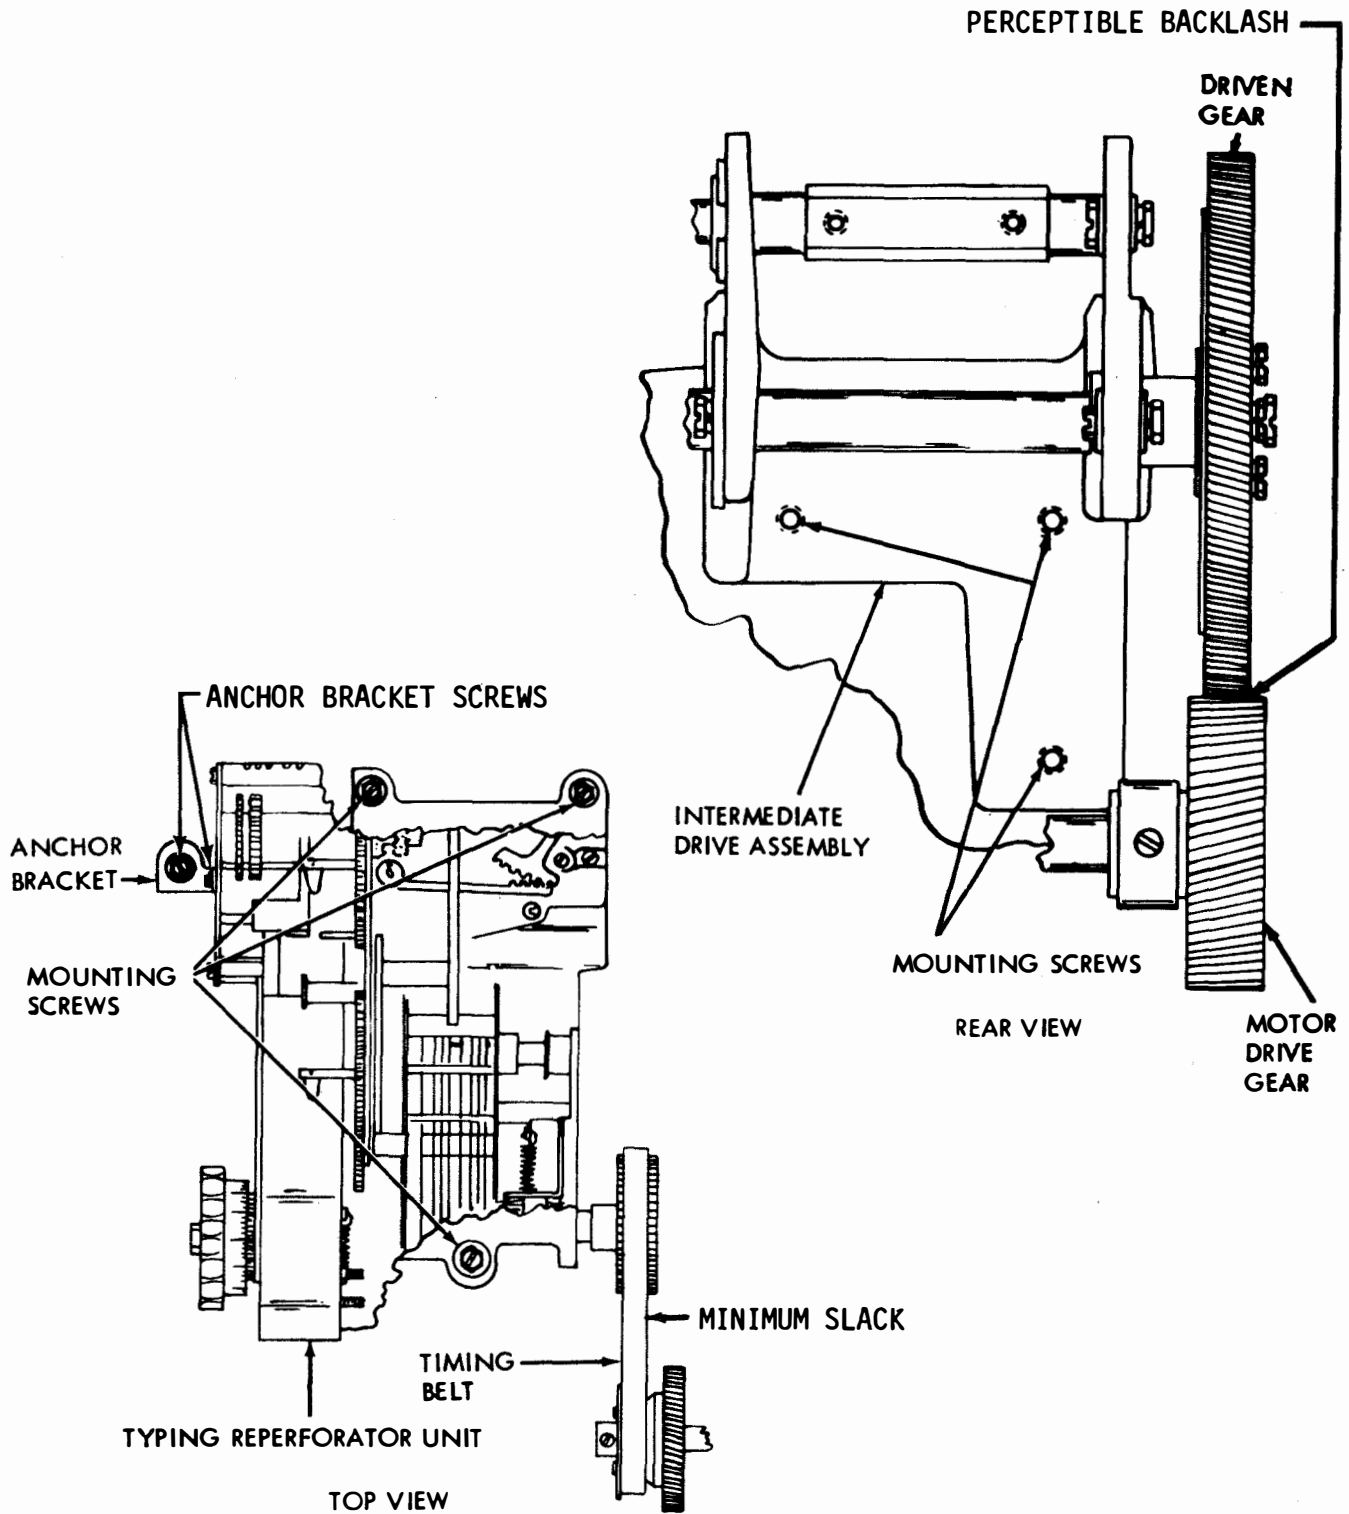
Intermediate Drive Assembly, Tape Container and Timing Belt
